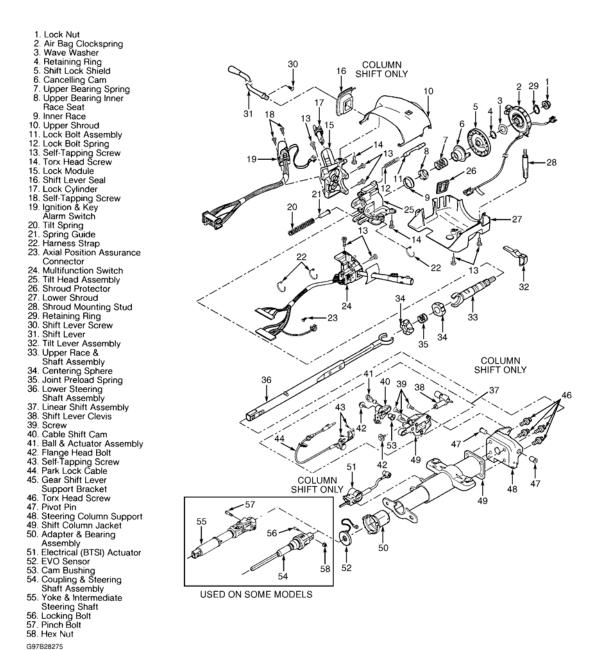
Exploded View Of Tilt Steering Column (Typical)
